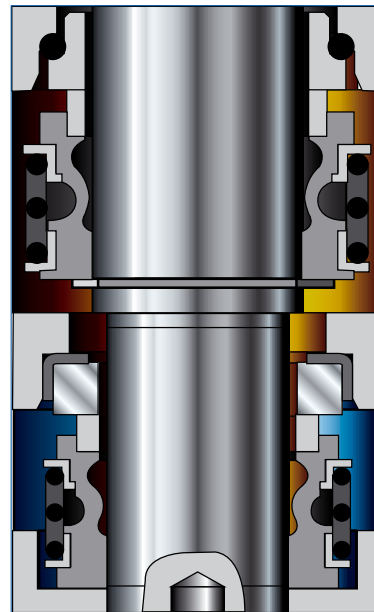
Typical tandem arrangement of mechanical seals with oil reservoir
